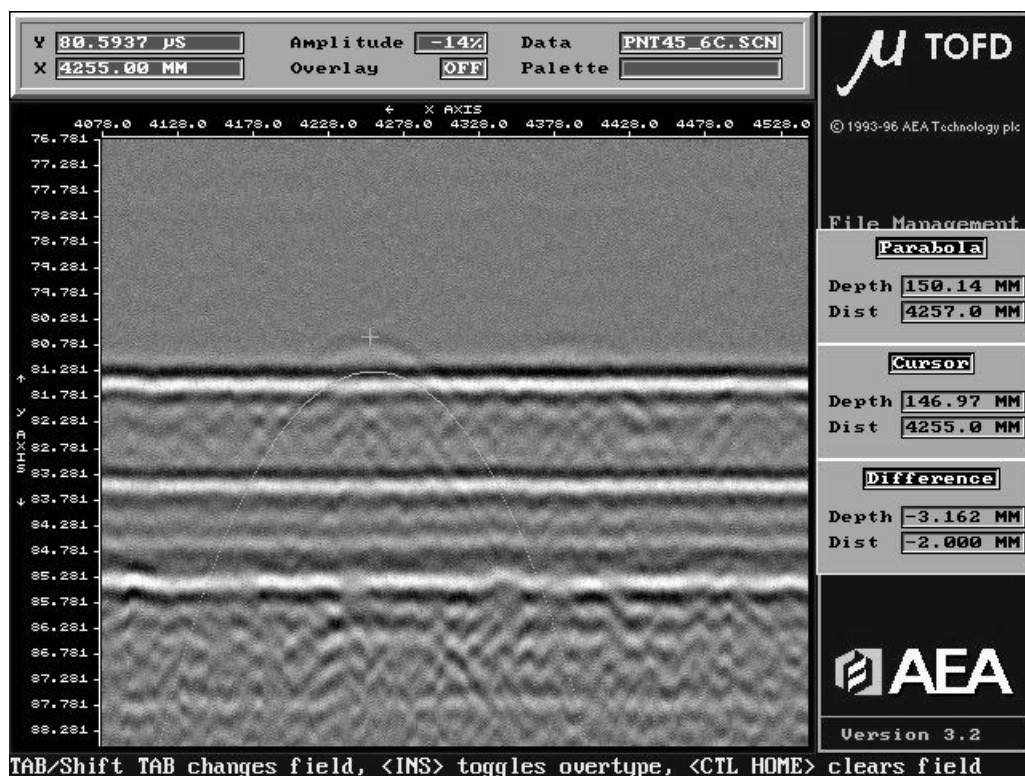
Sizing of a real under cladding crack by TOFD from the outer surface
